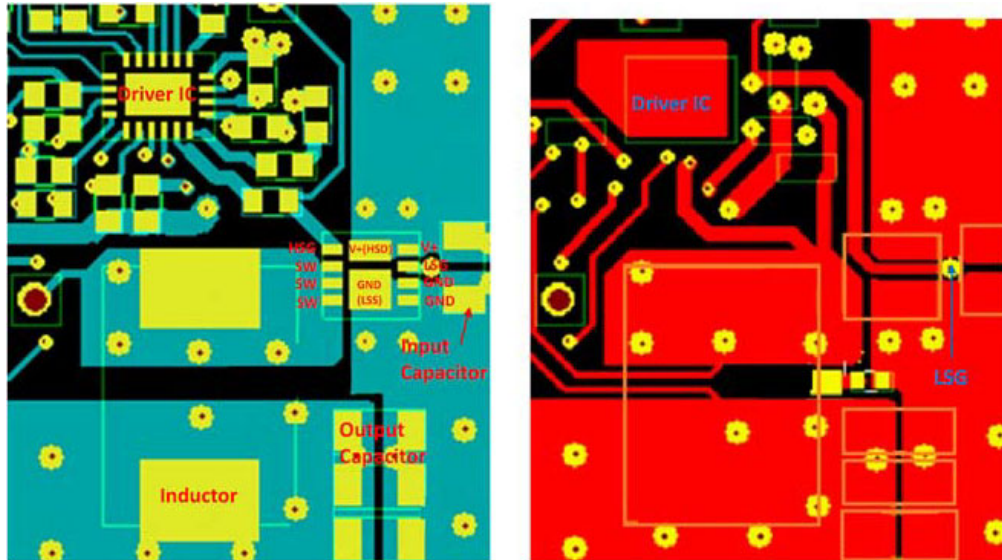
Top/Component (Green) View and Bottom (Red) PCB View
